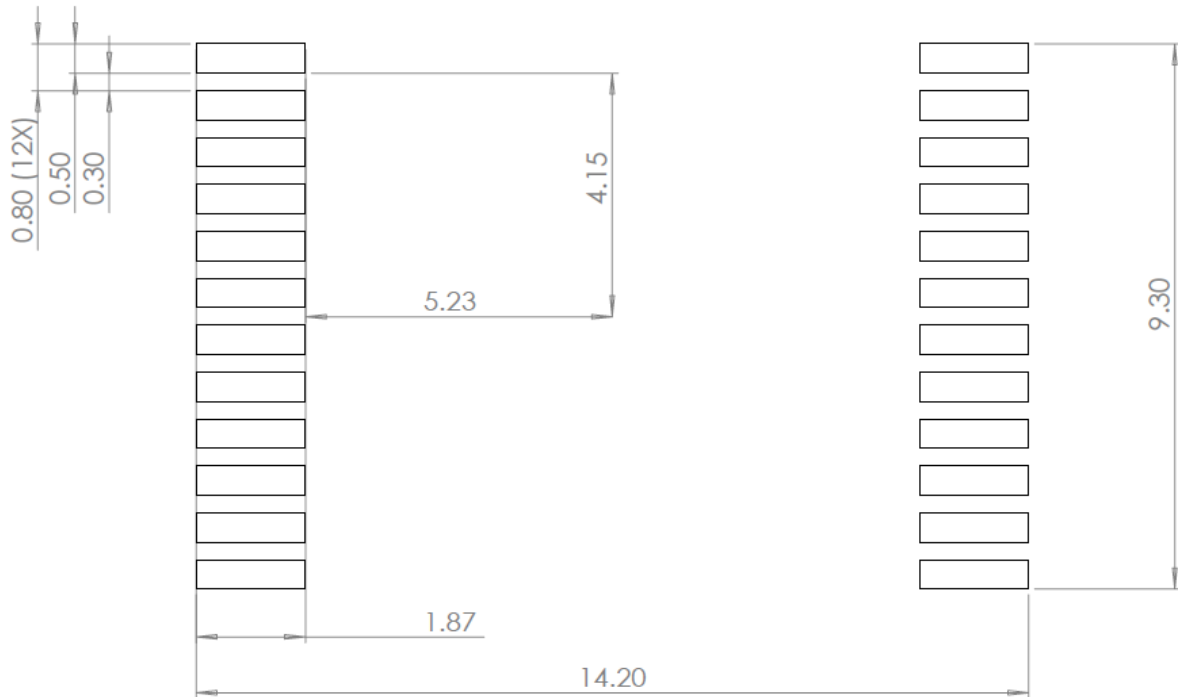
Recommended PCB pad layout for SCH16T. All dimensions are in millimeters.
